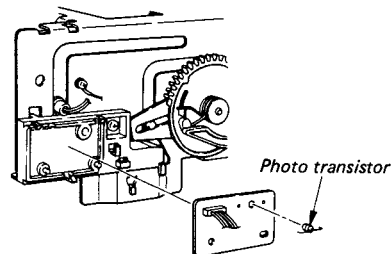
Replacement of photo transistor on FL P.C. board (L)
